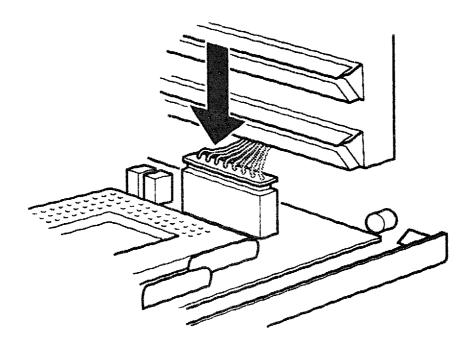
Joining the Ribbon Cable to the CPU Board
